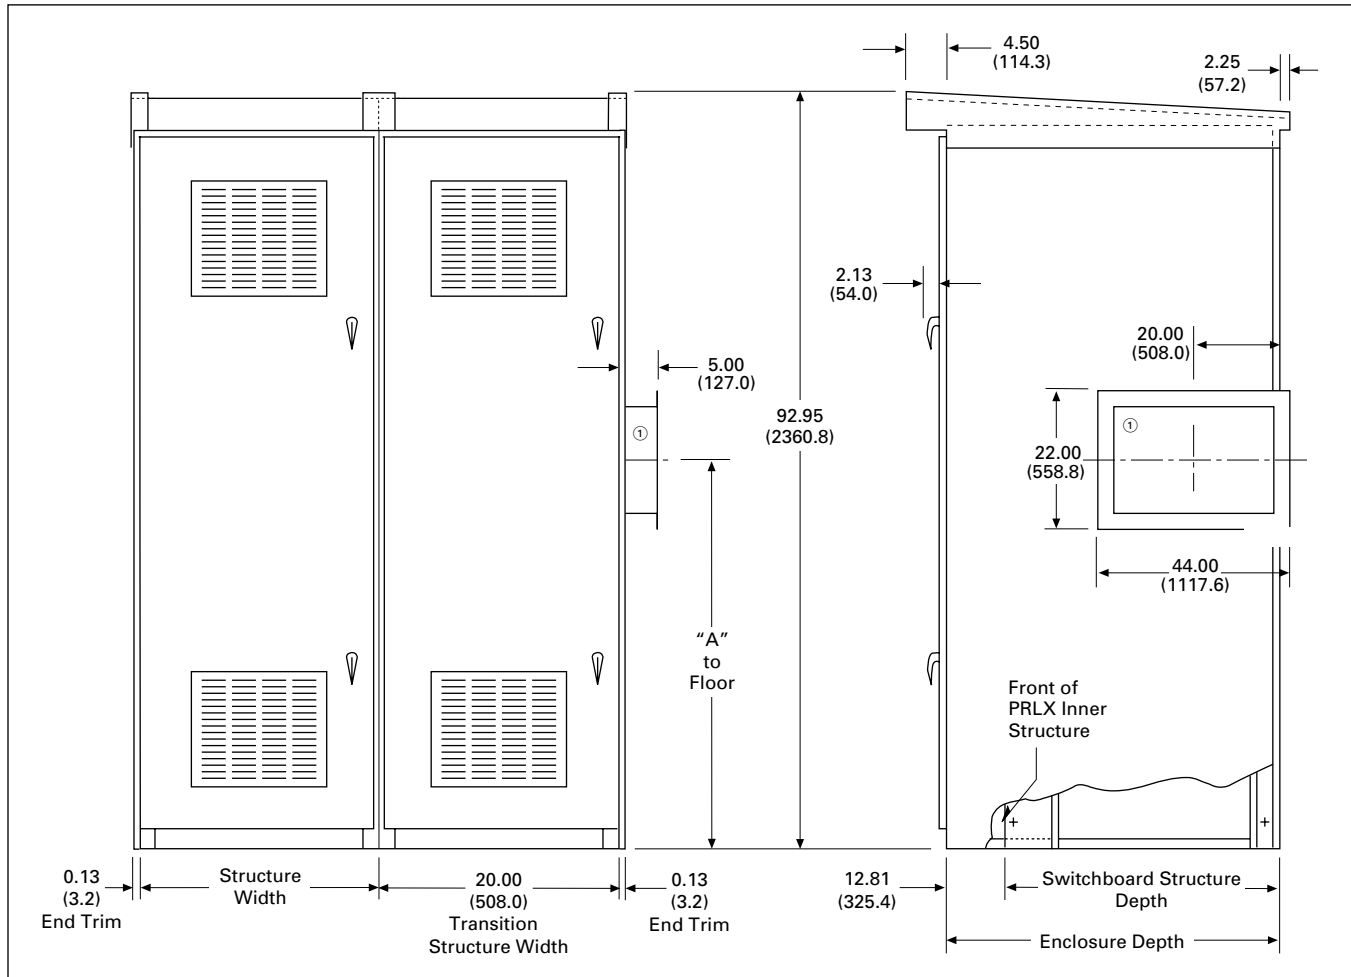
Front-Access—Non-Walk-In with Sloped Roof—Dimensions in Inches (mm)
